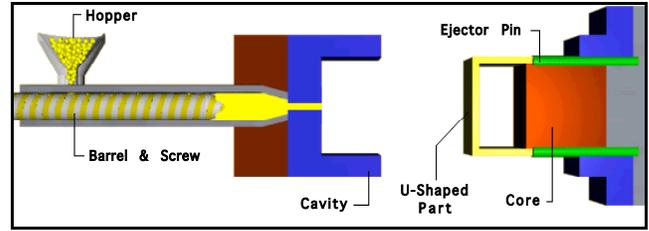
Injection Molding tooling required to produce a simple U-shaped part.
